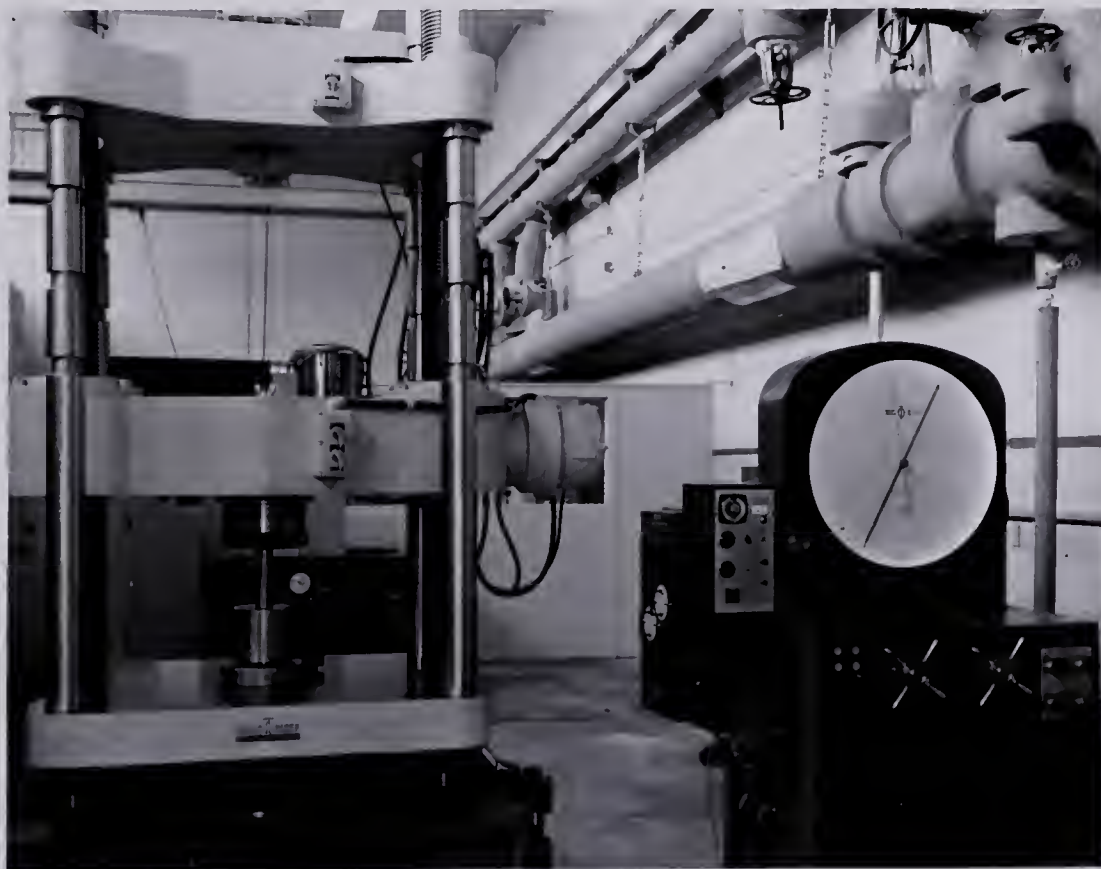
INVERTED MECHANICAL EXTRUSION APPARATUS IN TESTING MACHINE
